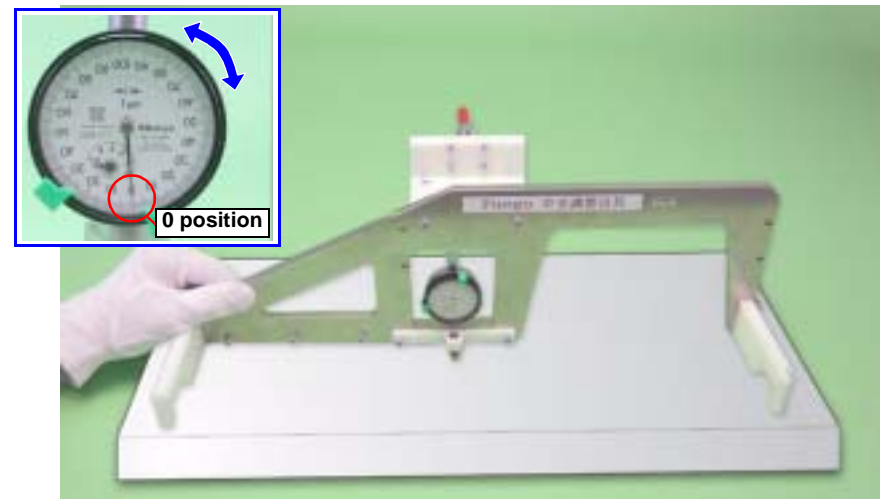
Setting the PF Roller Shaft Position Adjustment Jig (1)
